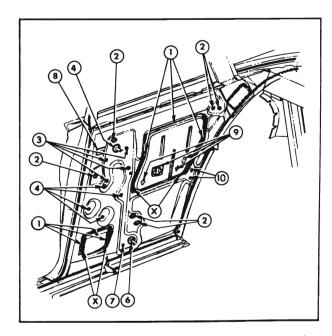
Quarter Inner Panel Sealing—"11" Styles
